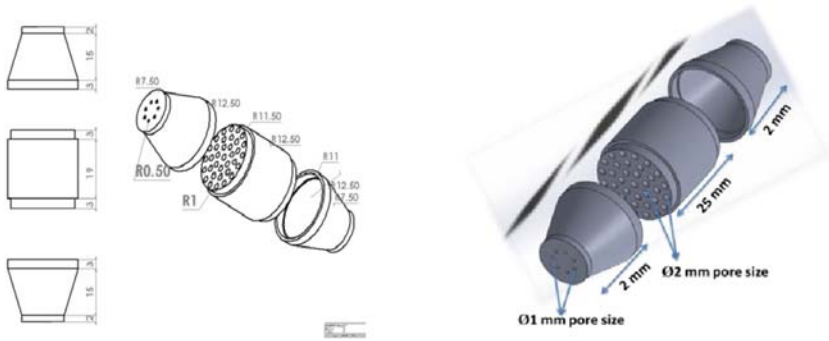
(A) Drawing and (B) CAD model of cylindrical design.
